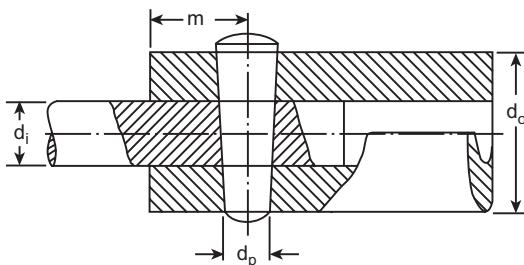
(b) Taper pin joint. The length of the taper pin should conform to diameter d_o in Table 24-25B.
